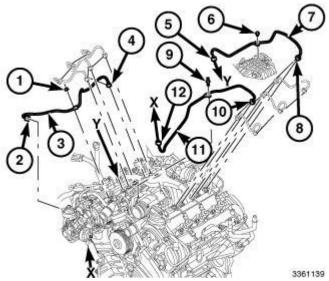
Right & Left High Pressure Fuel Tubes & Union Nuts Courtesy of CHRYSLER GROUP, LLC
